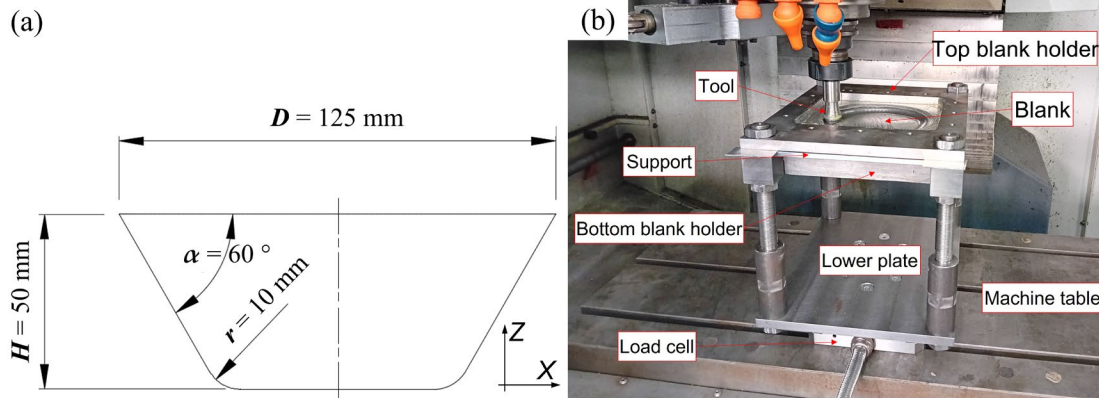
(a) Frustum cone geometry and dimensions, and (b) SPIF equipment and setup.
